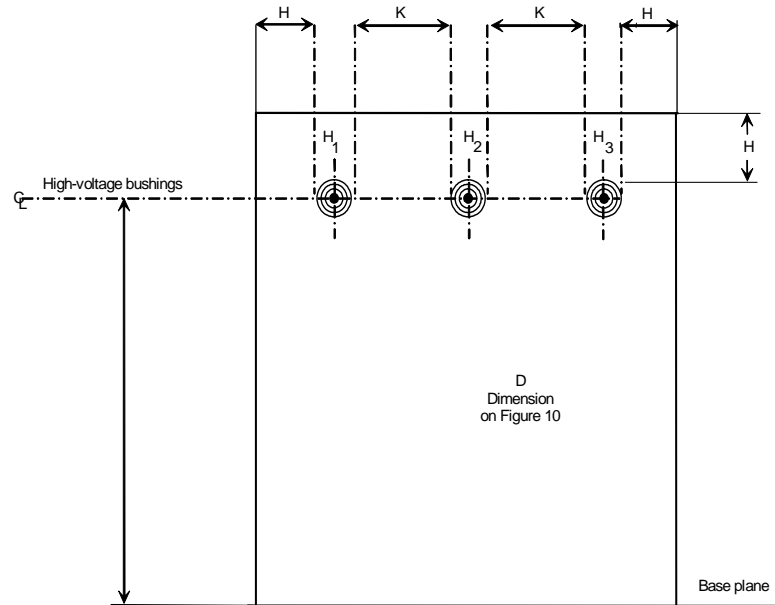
Minimum dimensions for radial-feed transformers with high-voltage bushings
